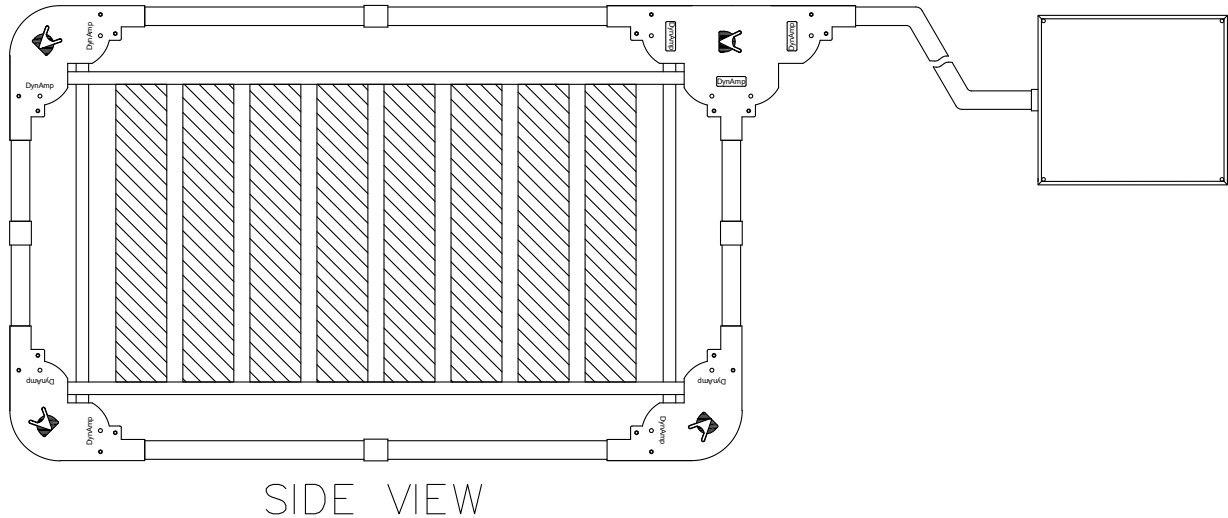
Bus Suspension Mounting on a Horizontal Bus
